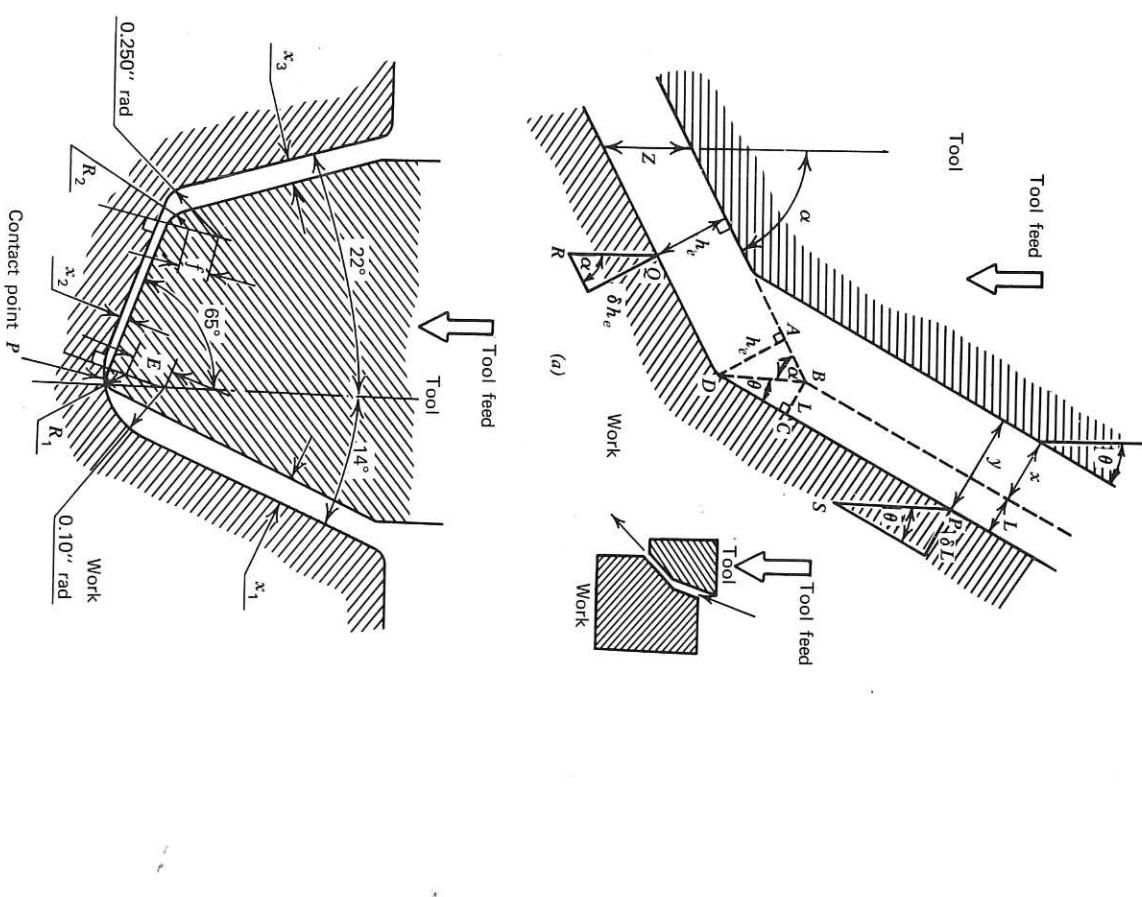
(a) The geometry of the machining gap during a die sinking operation. (b) Actual variation of tool and work piece profiles for a die sinking operation.
